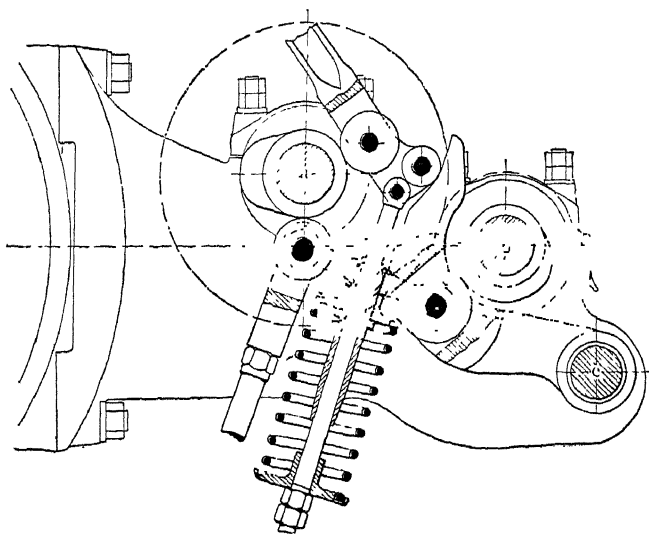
VALVE-MOTION OF THE DINGLER'SCHE MASCHINENFABRIK, ZWEIFRÜCKEN.
